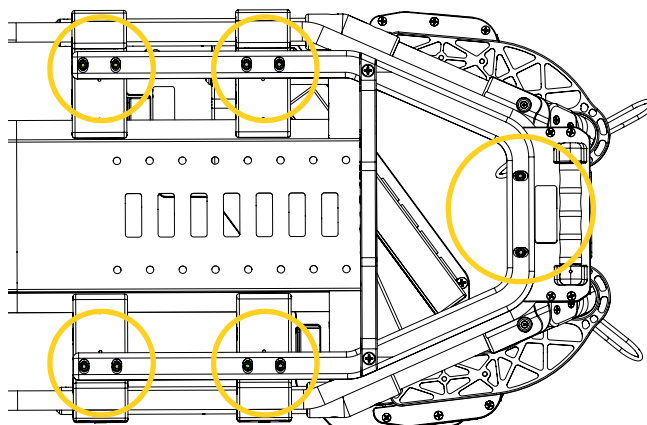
Tightening the clamp blocks and handle screws (bottom view)
